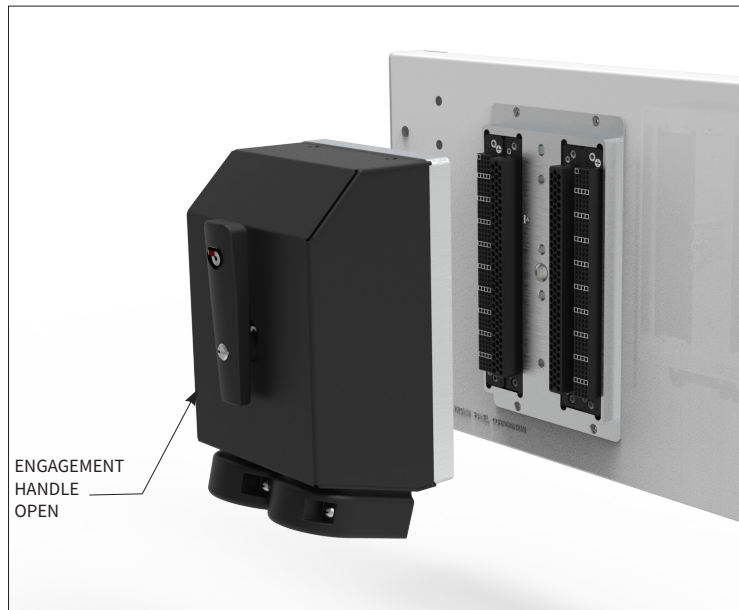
Figure A. Ensure that the ITA handle is in the up/open position before engaging with the receiver.
